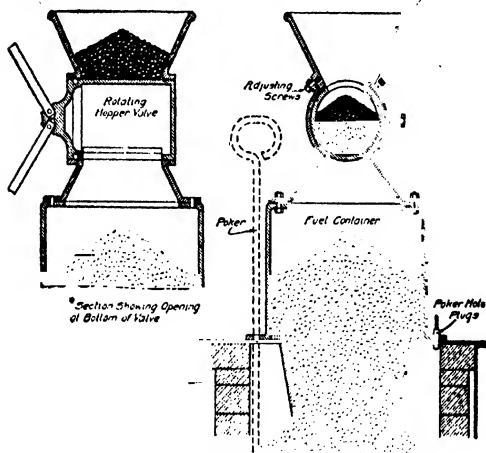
Rotating Charging Valve of Crossley Suction Gas-Producer
